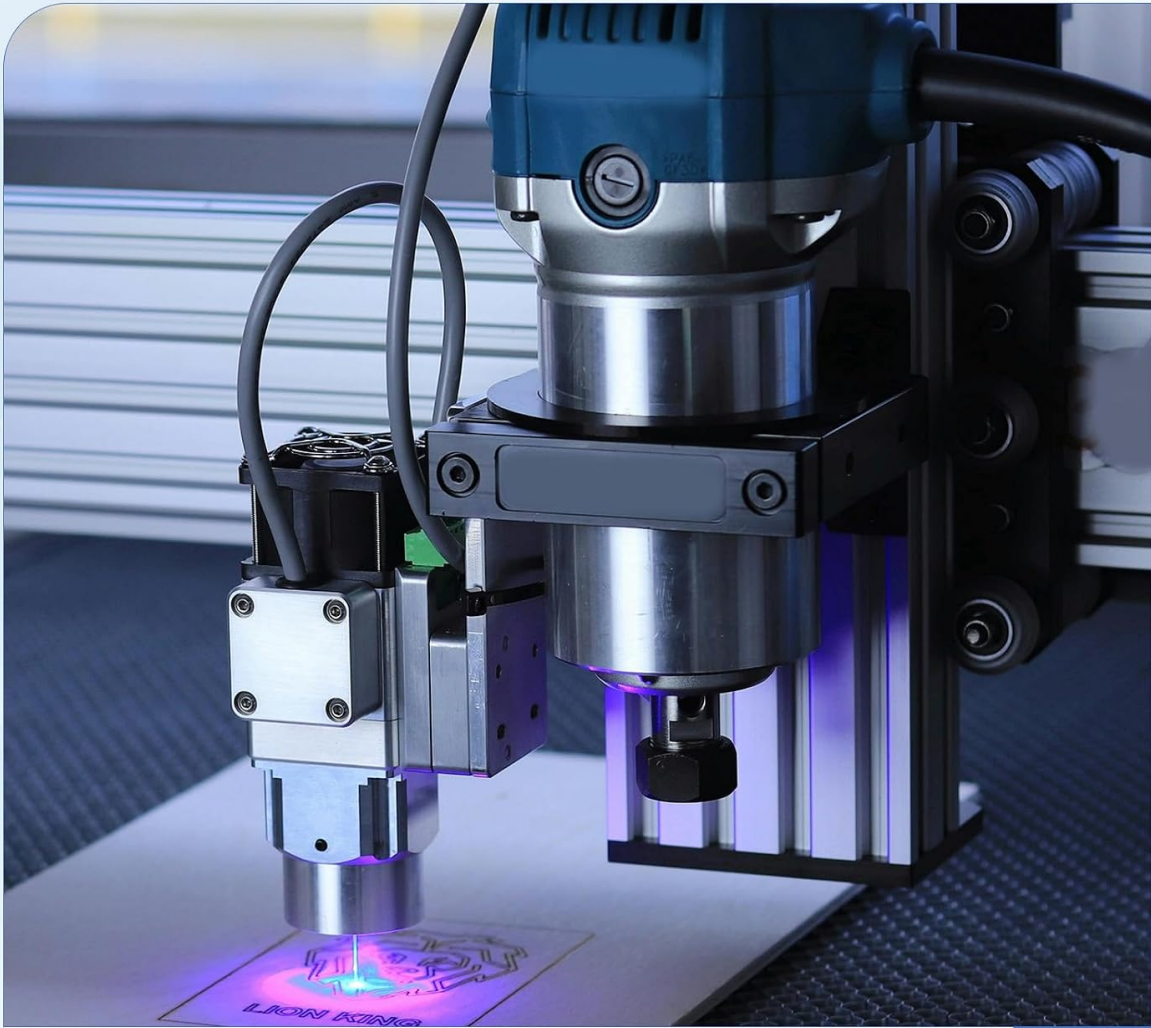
Example of the SK6 support used in a precision machine, likely a 3D printer or CNC router.
